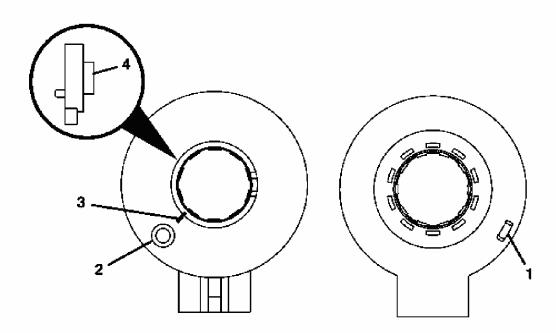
Identifying Steering Wheel Position Sensor Centering Pin Hole, Rotor Flange Cuff & Alignment Mark Courtesy of GENERAL MOTORS CORP.
